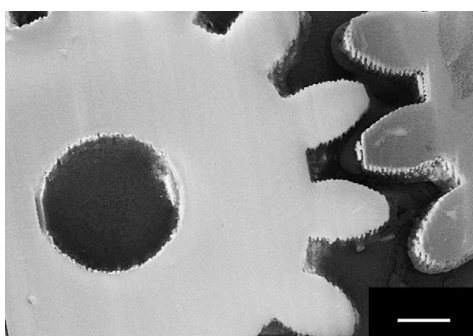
Sintered Si_3N_4 gearwheels fabricated by ink-jet printing and sintering [28] (scale bar 1 mm long).
